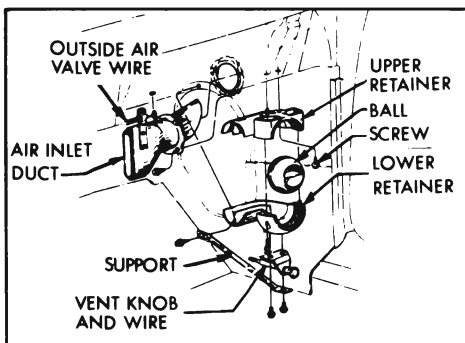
Air Inlet Duct and Right Air Outlet Installation
